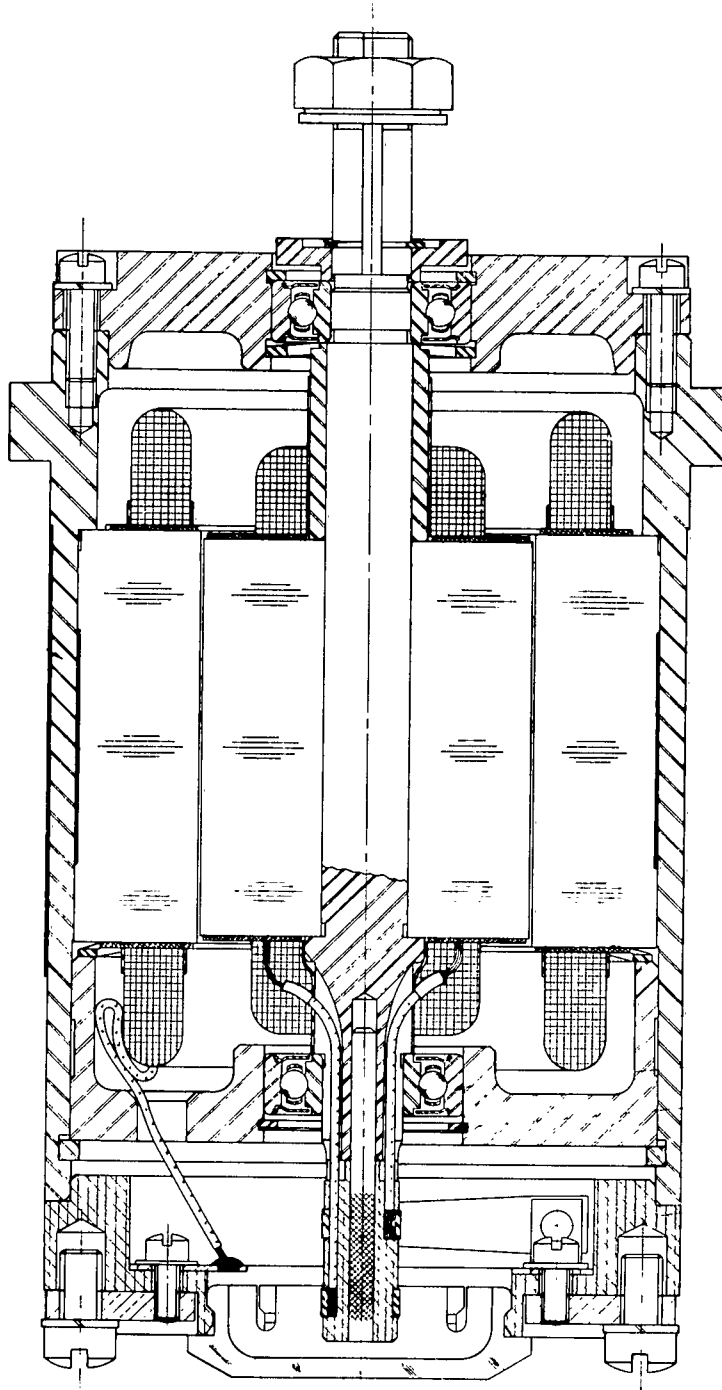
Synchro, Transmitter Type 23TX6 - sectioned view
